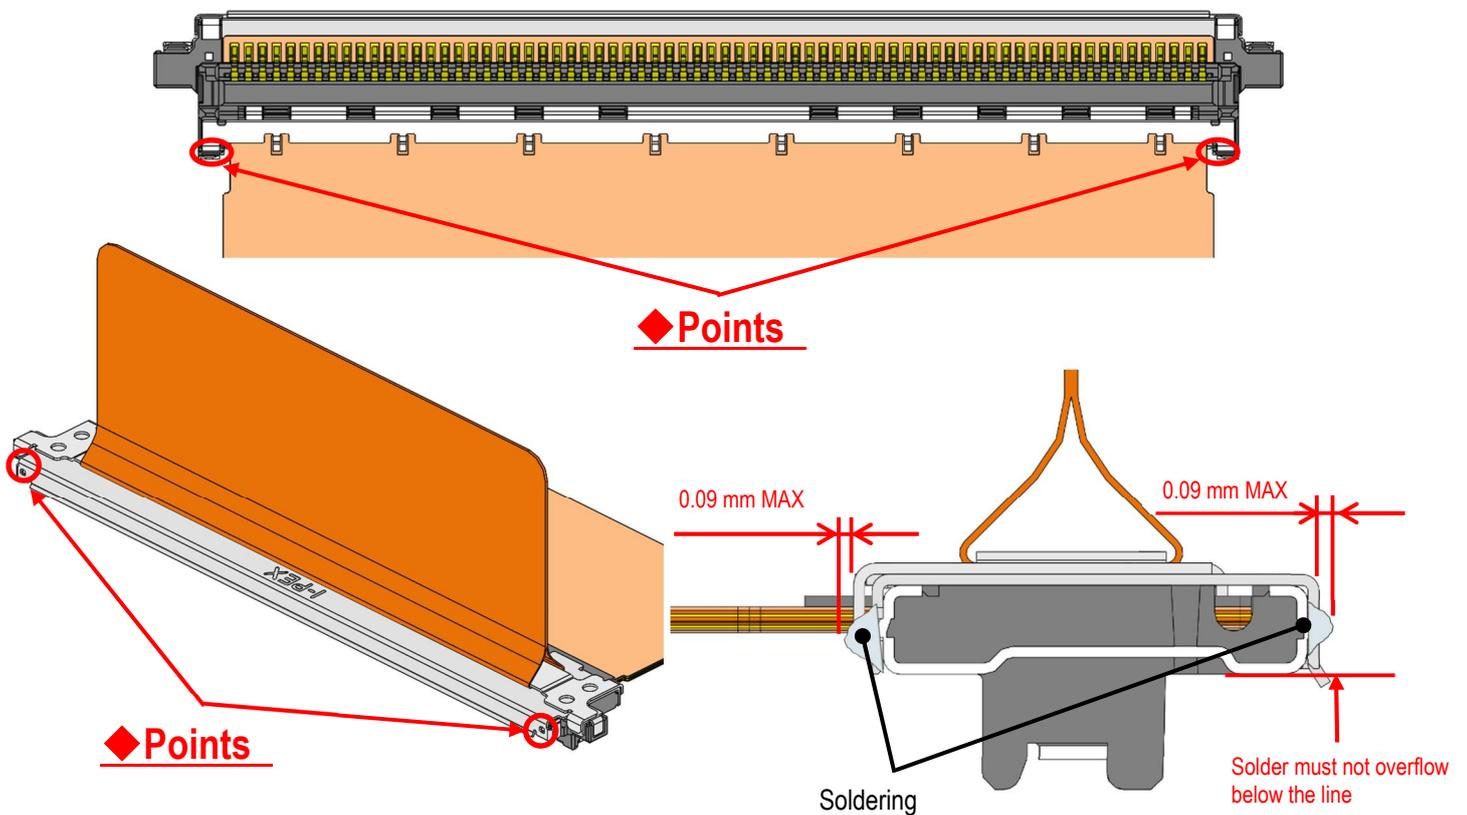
Additional Soldering Points for Shell-A and Shell-B
